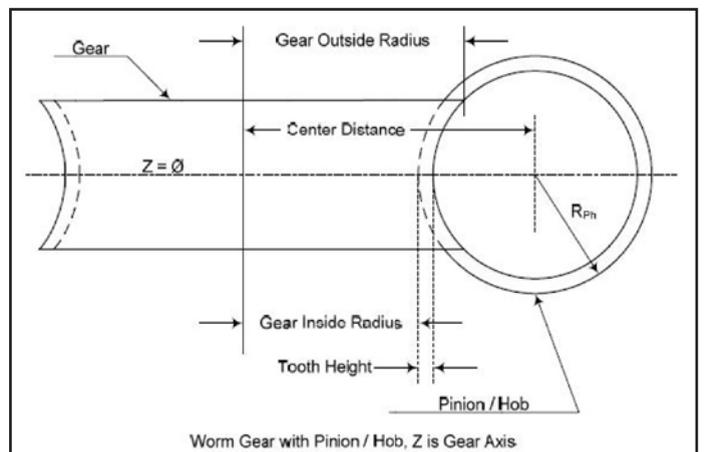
Worm gear/pinion assembly or gear/hob set-up.
